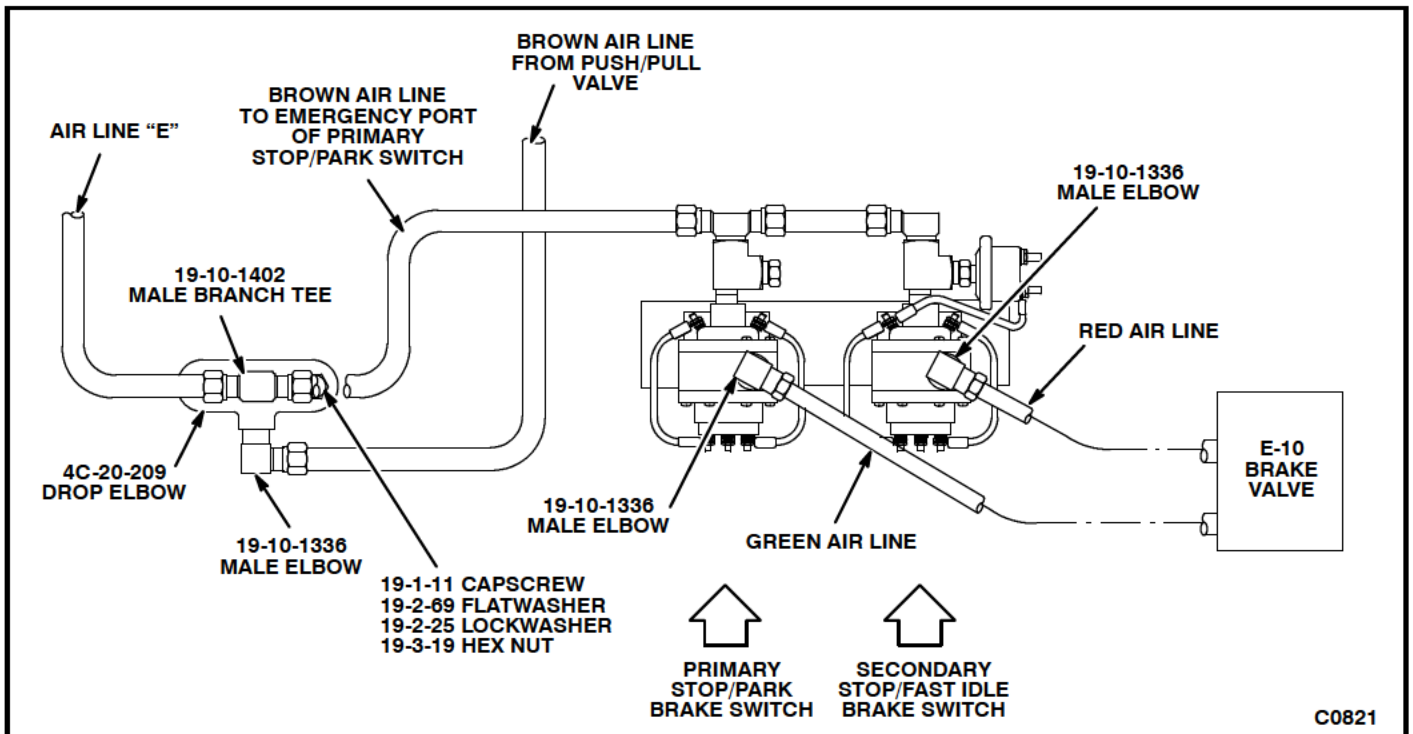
Brake System With E-10 Brake Valve and Without Parking Brake Interlock.
